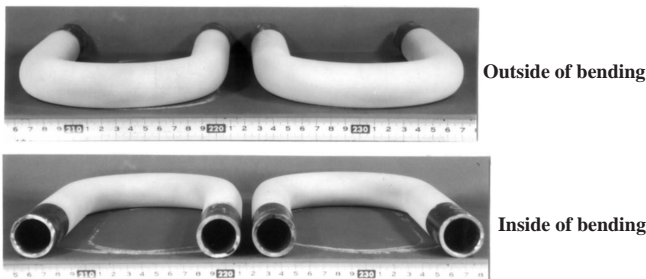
Cold bend test (bend radius: 65R(2.0D), after liquid penetrant testing)
